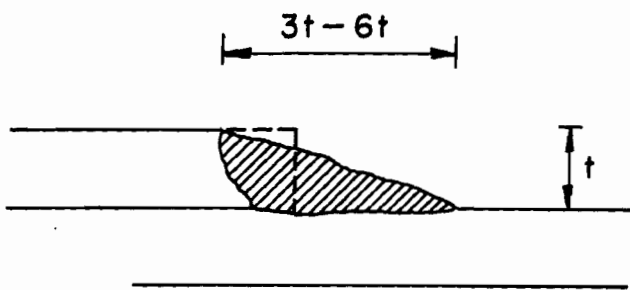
Approximate Shape of Fillet Welds in Current Investigation
